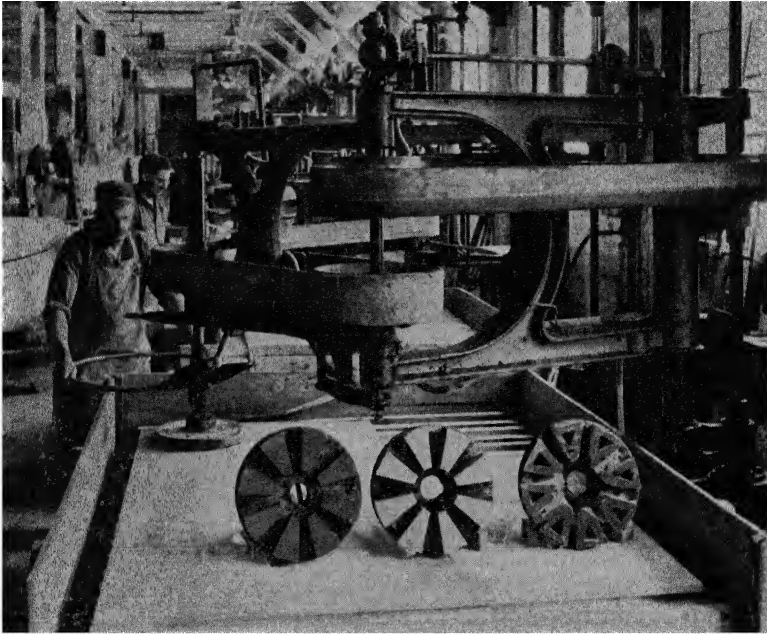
A buffer used for gritting and polishing marble surfaces. (*Courtesy of Vermont Marble Company.*)
